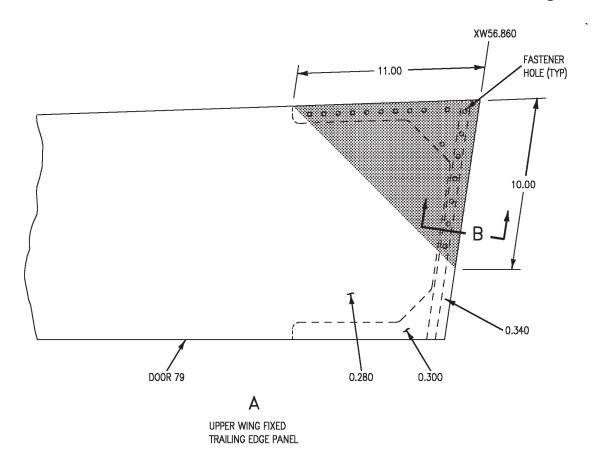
Inner Wing Upper Surface Solid Composite Laminate and Door Sill Inspection Areas (Sheet 1)
